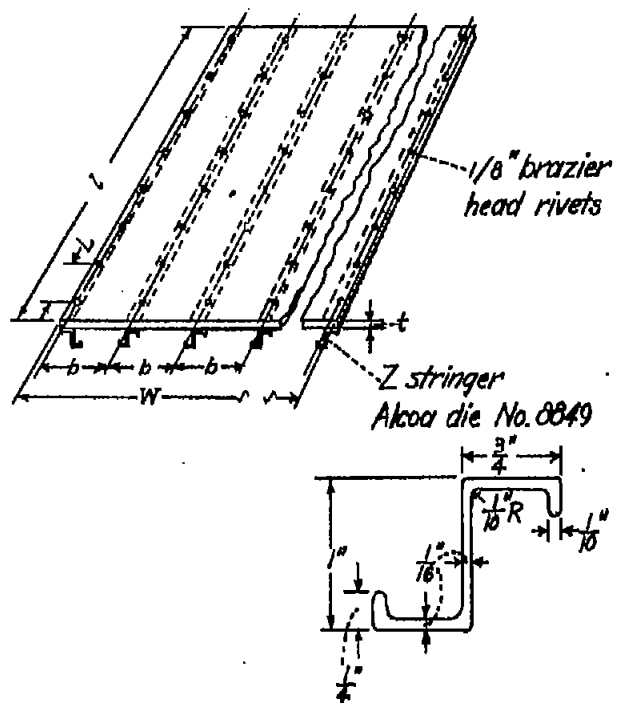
Construction of sheet-stringer panels and nominal dimensions of stringer.
